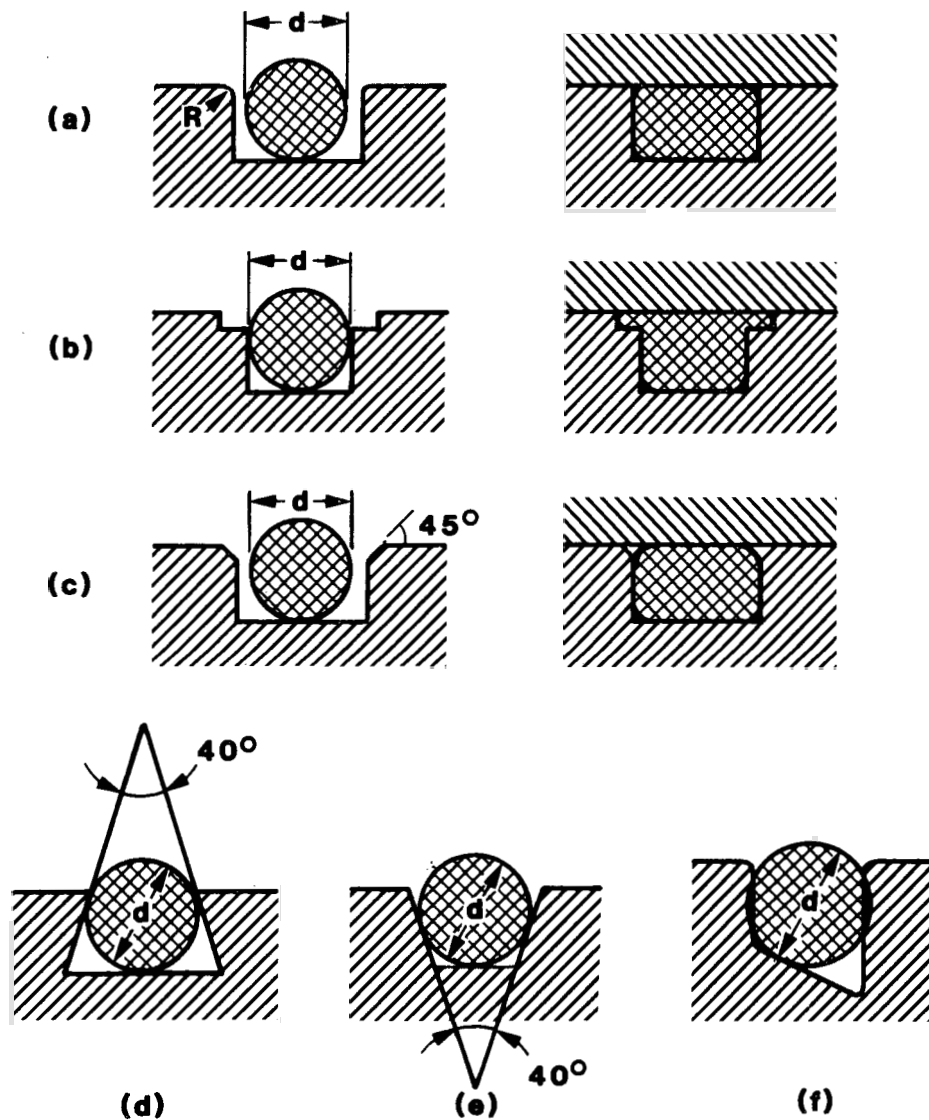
Rectangular Grooves and Trapezium Grooves for O-Rings ( $d = \text{O-ring diameter}$ ) (Ref. 3.4-2).
